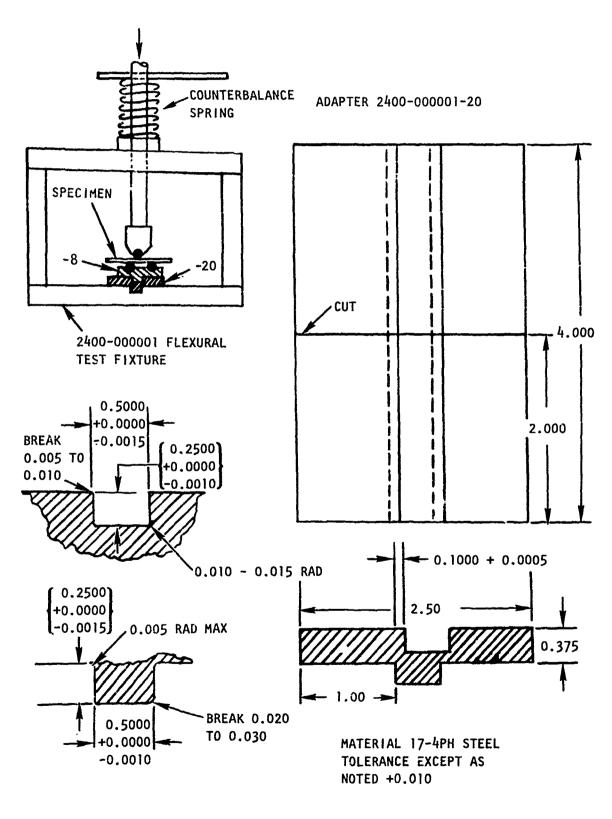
Test Fixture Adapter for Offset Interlaminar Shear Test
